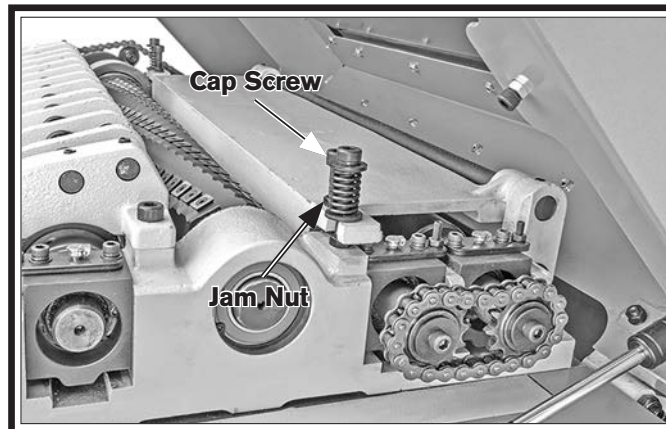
Location of infeed roller bearing block and height adjustment controls (right side).
